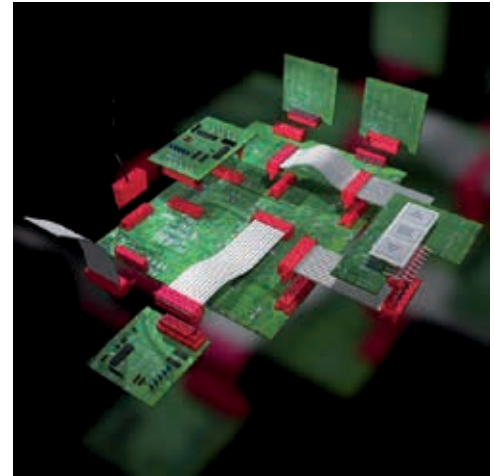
Printed circuit board connector for ribbon cable and board-to-board connections – source: TE Connectivity
